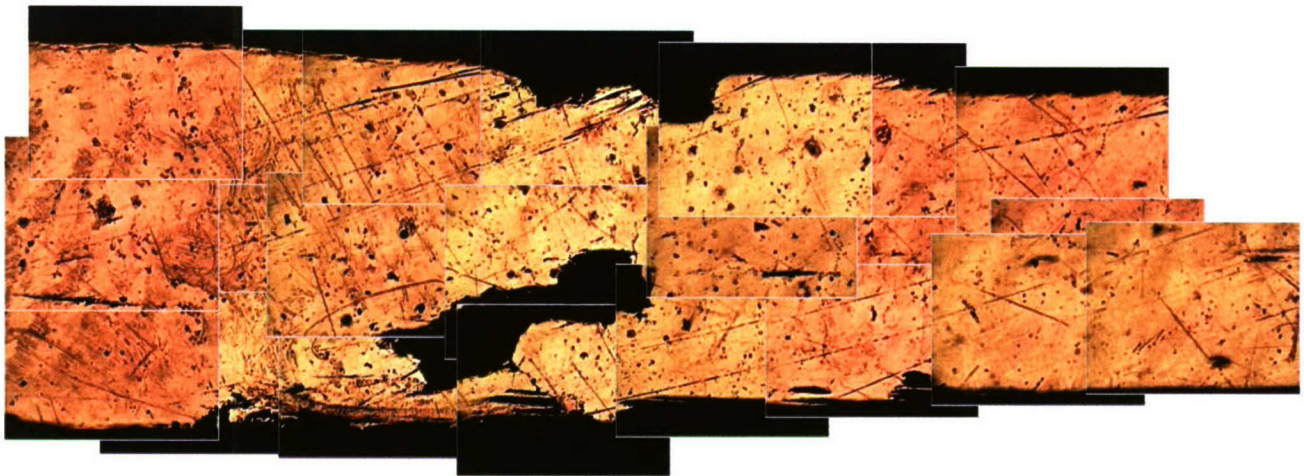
Cross-section of steel plate EAFSW weld having similar parameters as previous. The artificial mica backing plate beneath the weld track was replaced with a zirconia coated stainless steel plate. Scale:  $\sim 15X$
